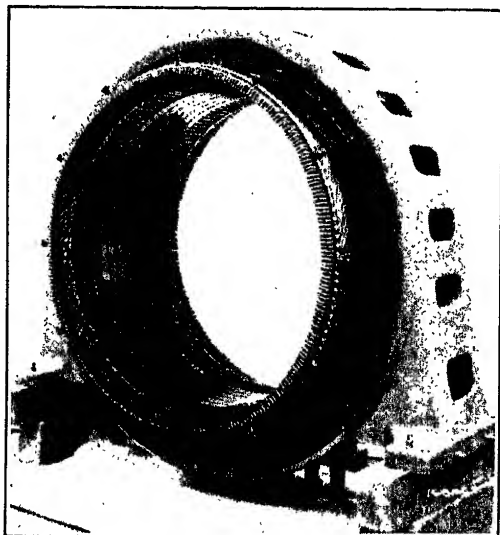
STATOR OF A LOAD REGULATING MACHINE UNIT
